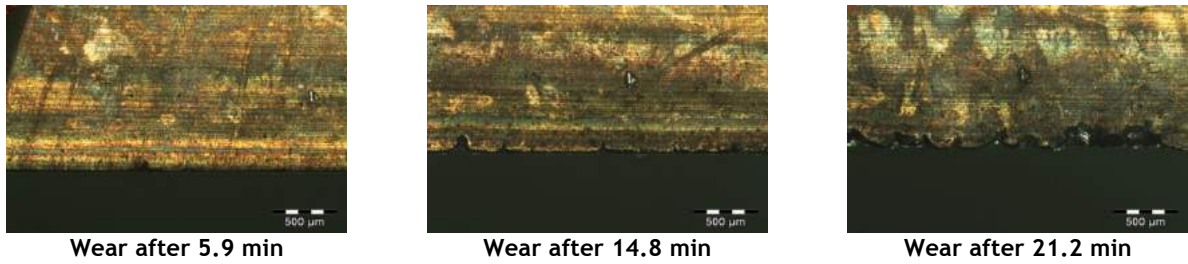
Wear scar progression for magneto-abrasive machining coating treatment under flood cooling, machining 40CrMnMo7
